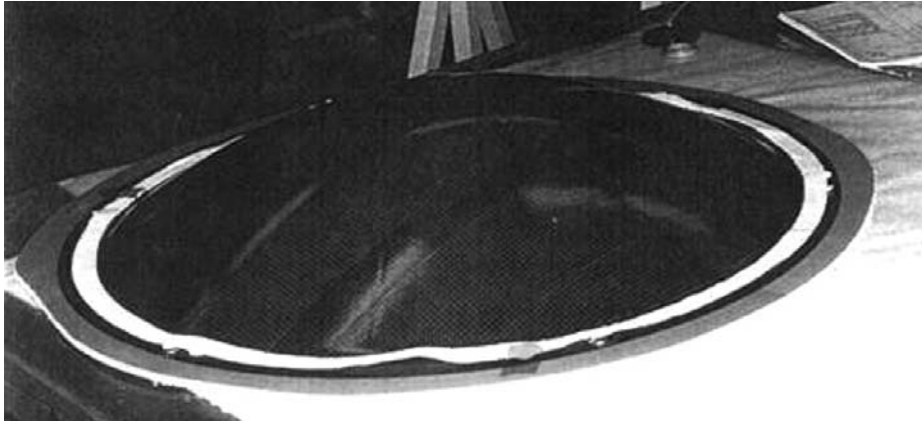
Cassini Ku-/Ka-band FSS engineering breadboard on mold.
